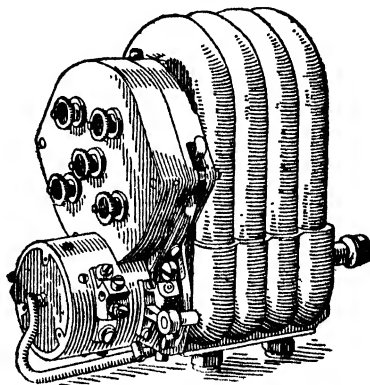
Low-tension magneto with circuit breaker and distributor.
